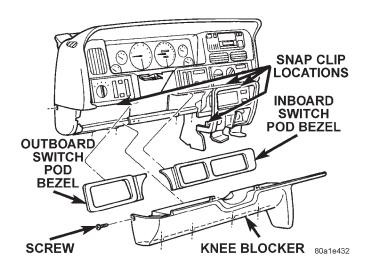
Steering Column Opening Cover/Knee Blocker Remove/Install
